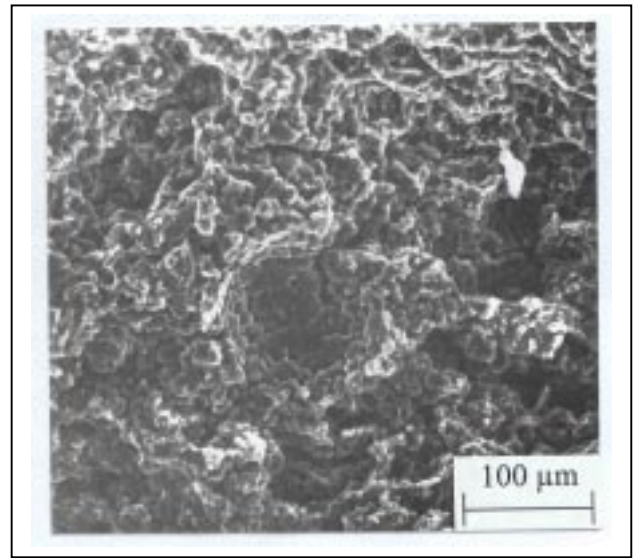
Gas pore with oxid layer on the fracture surface of AZ91 (DC)
